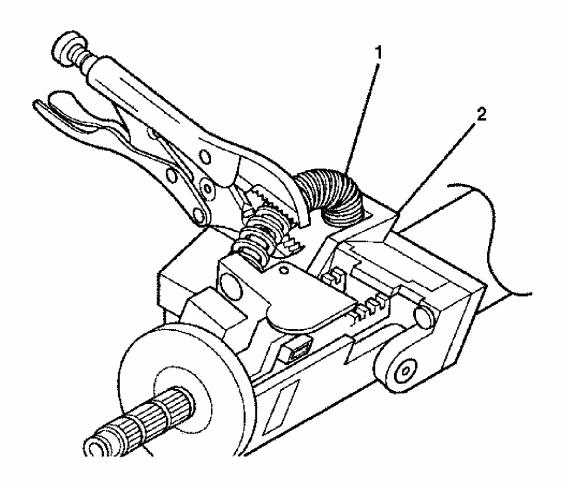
Installing Tilt Spring Onto The Steering Column Support Assembly Courtesy of GENERAL MOTORS CORP.
